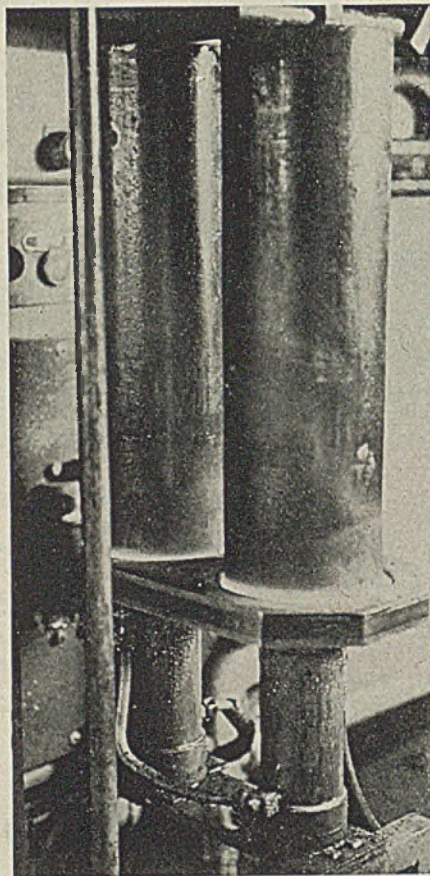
Closeup of shell base braze in operation. Note dual fixture. Clamps on top connected to air cylinder force plug in place when silver alloy ring melts in the joint
